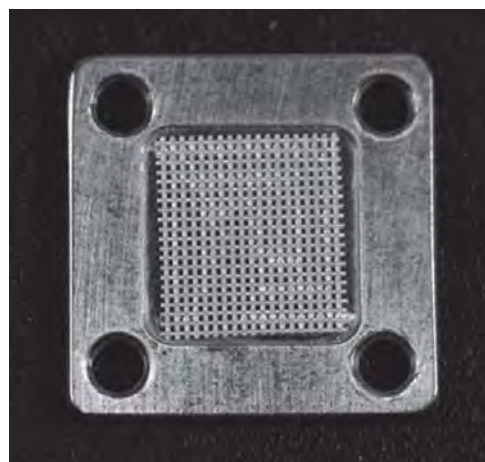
Photograph of a 316L stainless steel plate. The well machined out of the underside was used to hold a PEEK membrane (shown in well).
